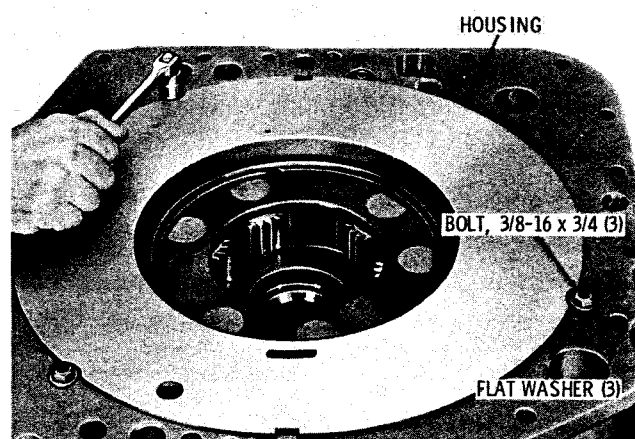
Installing forward clutch piston housing bolts (5631 models)
